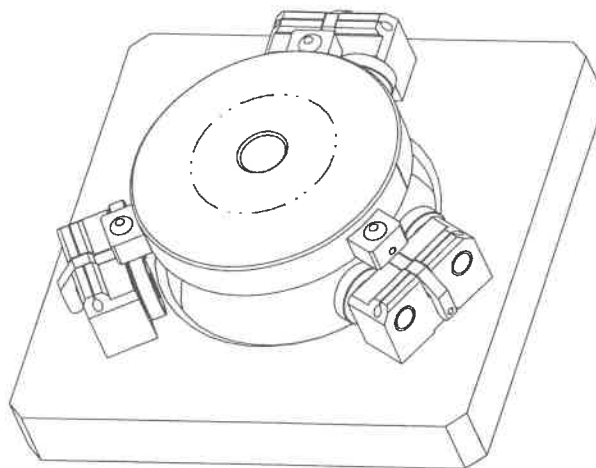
The M1 metrology mount uses pairs of rolling-element bearings to form a three-vee kinematic coupling.
